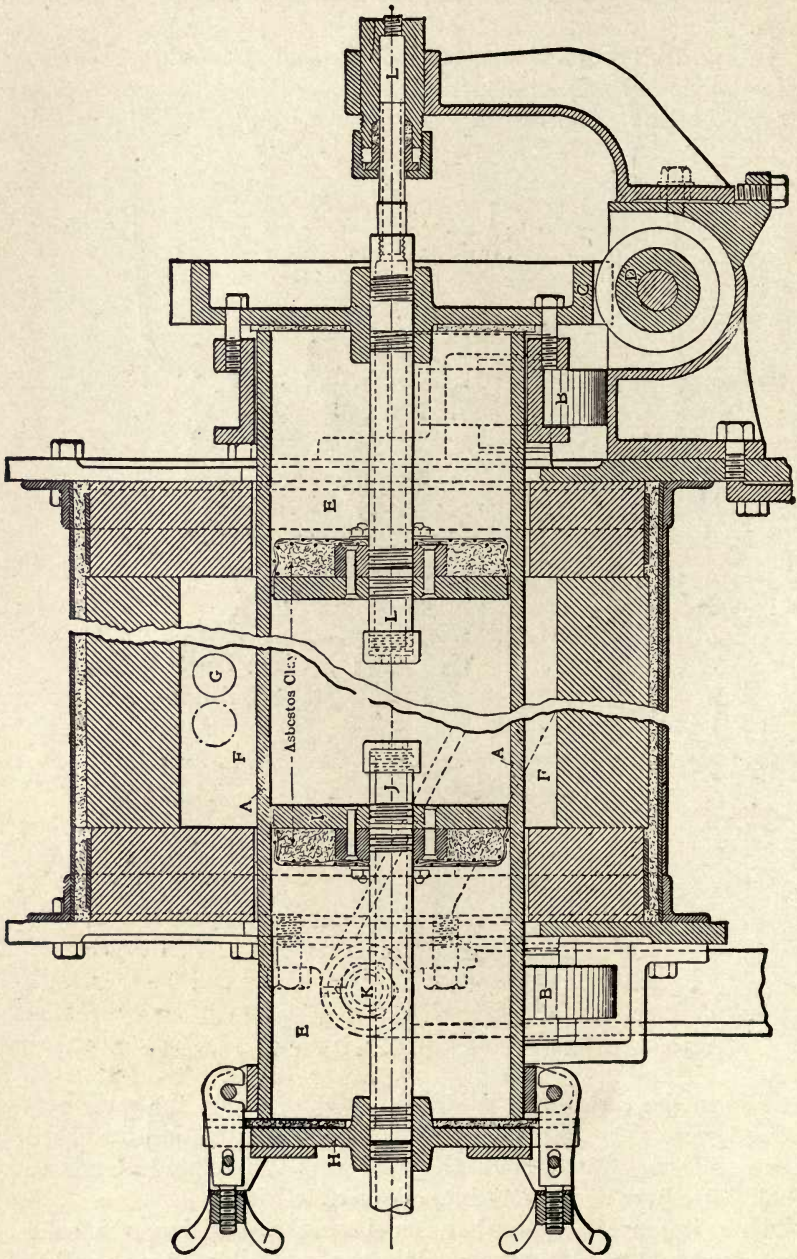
Sectional View of Carburizing Machine. (American Gas Furnace Co.)
